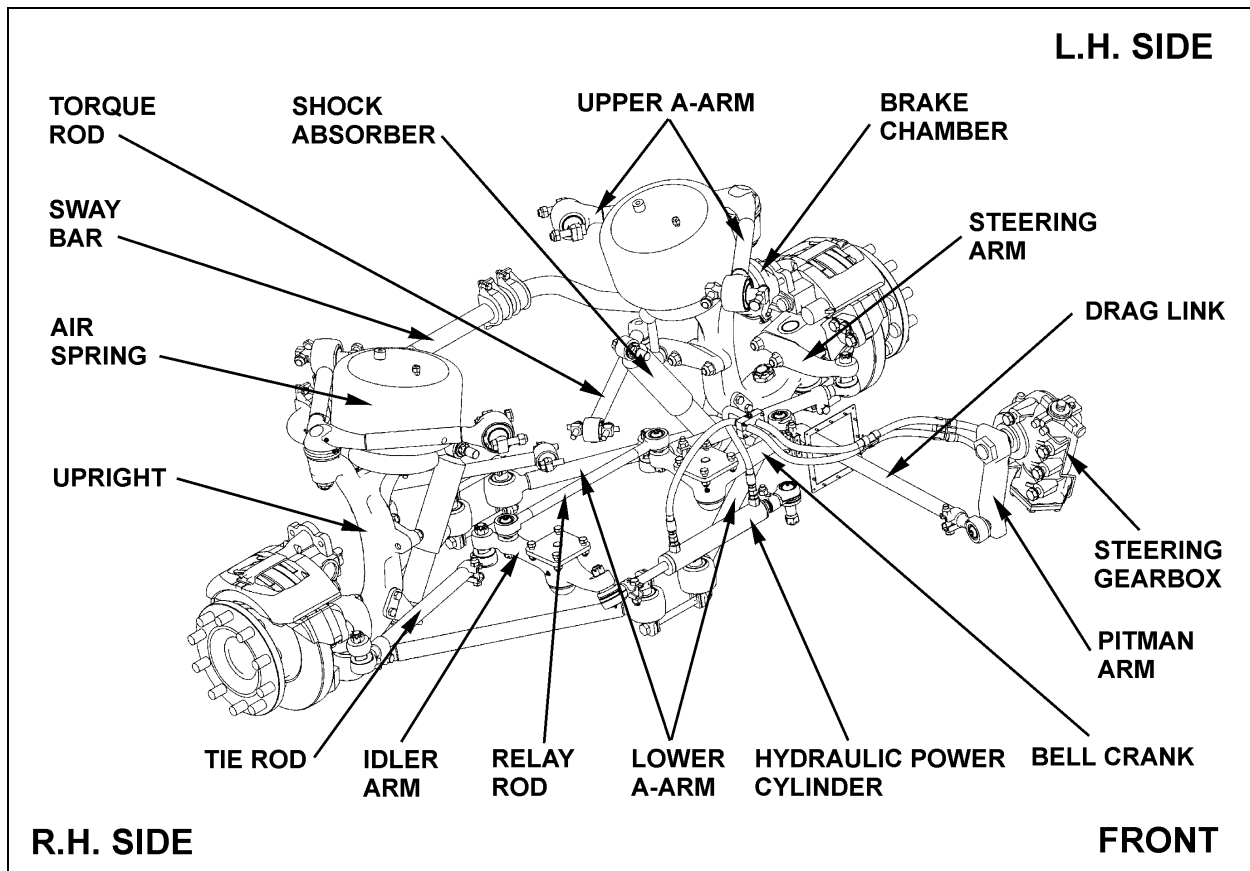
SUSPENSION AND STEERING LINKAGE
